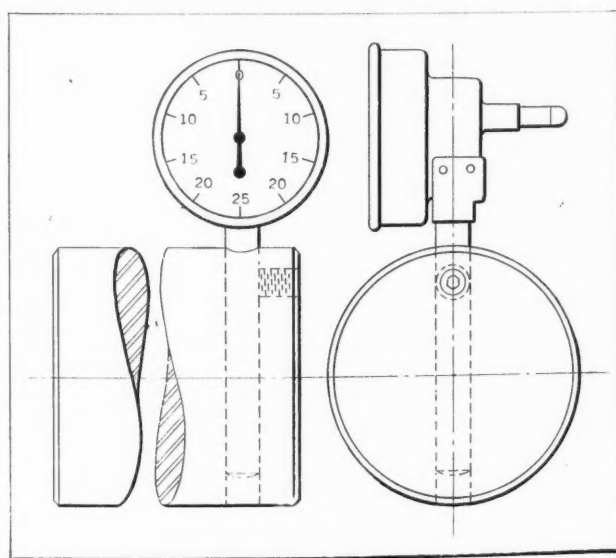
Fulcrum with Indicator Attached for Straightening Shafts between Lathe Centers
